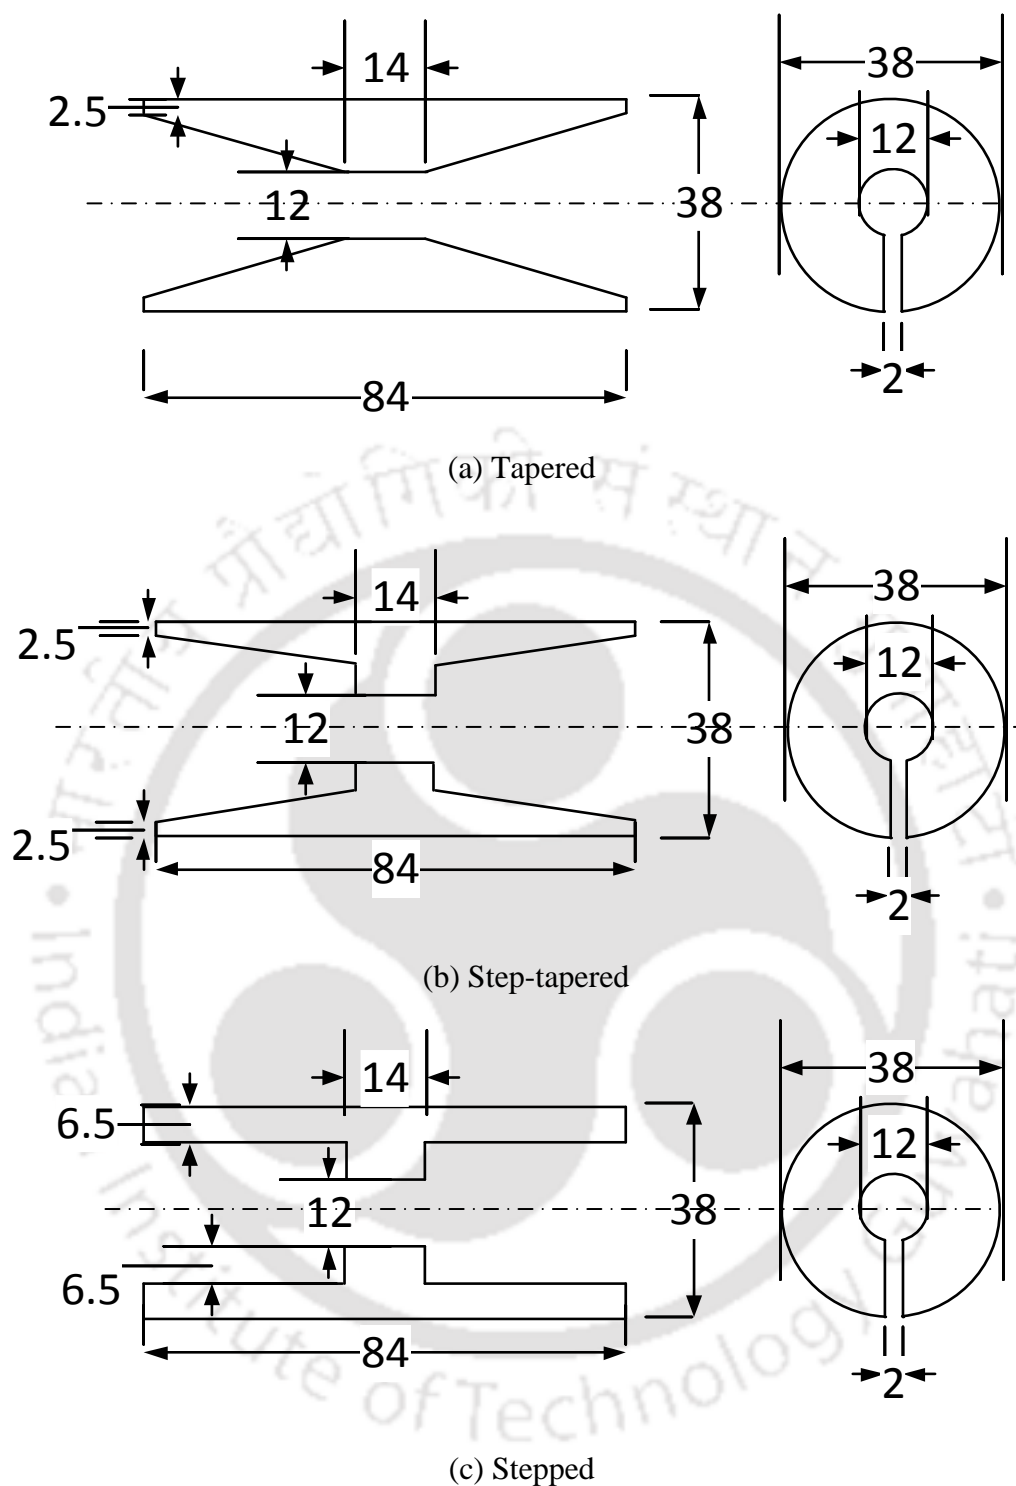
Dimensions of the tapered, step-tapered and stepped types of field shaper
